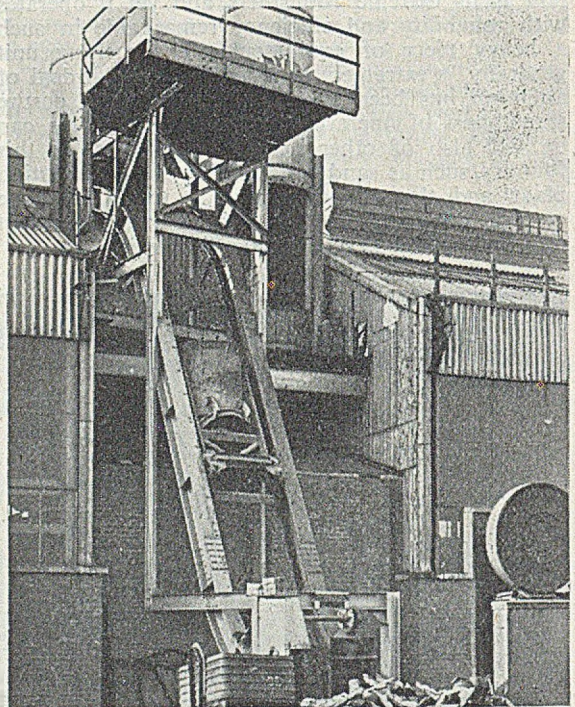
Front View of the Swivel-hoist Charger arranged to serve the Left-hand Furnace. The Hoisting Mechanism is mounted on the Over-head Service Platform.
